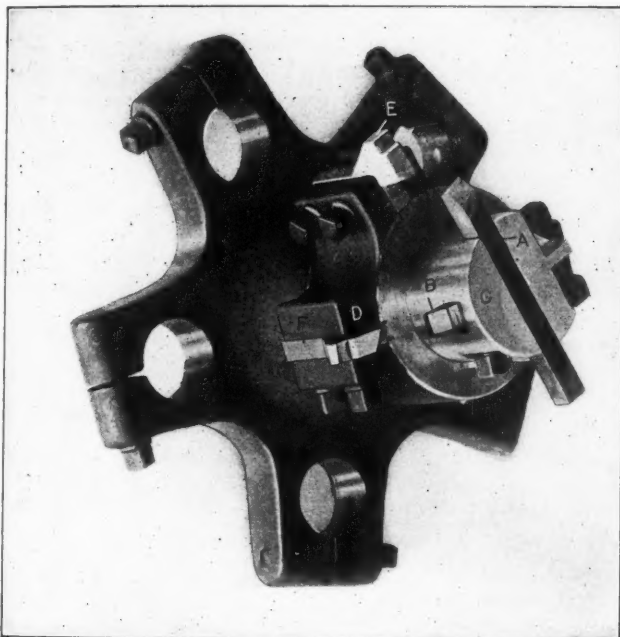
Overhanging Turning Attachment with Extra Cutter-head
